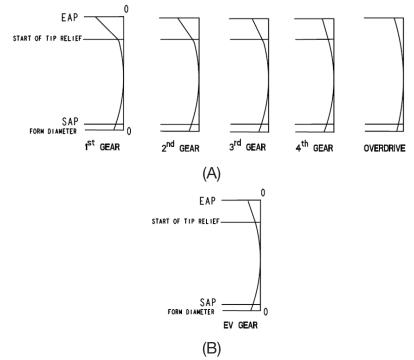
Illustration of Involute modifications of: (a) different gears of a multi-speed gearbox and (b) gear of a single-speed gearbox.
